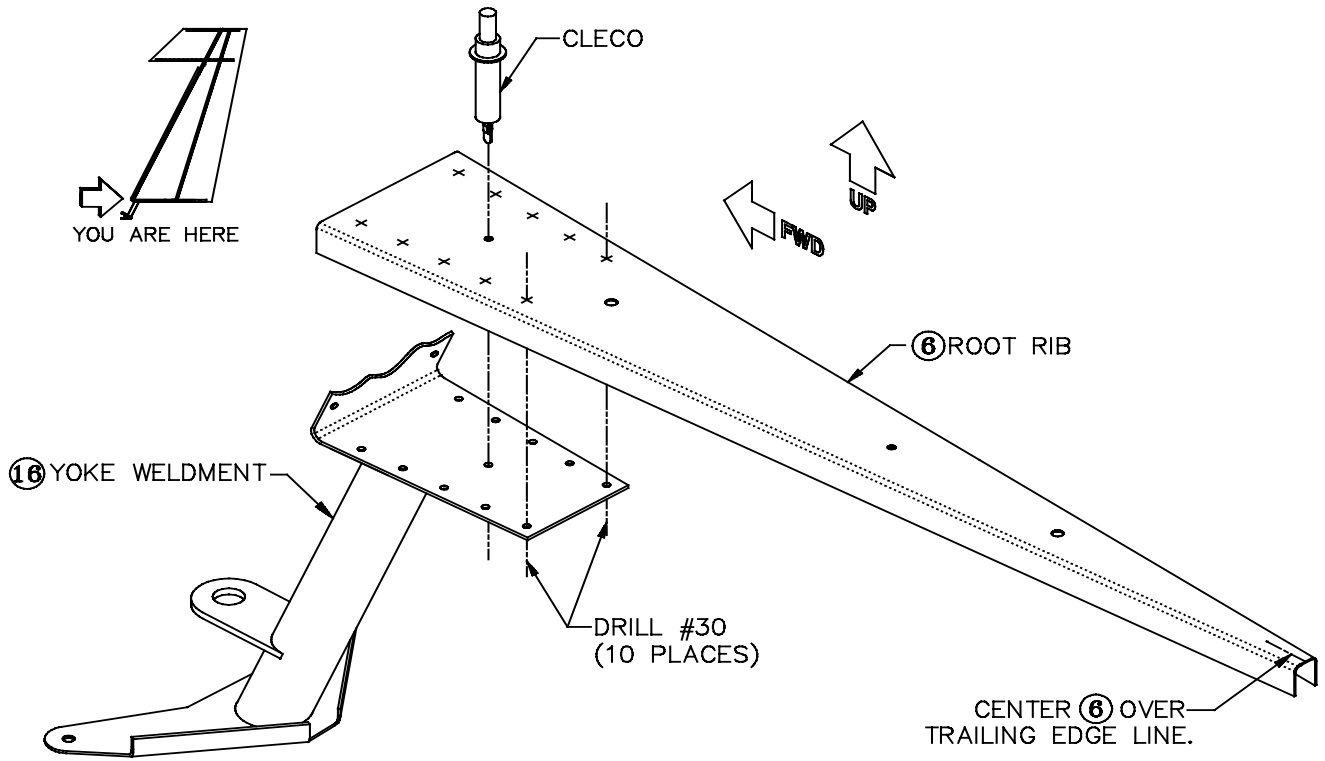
Root Rib/Yoke Weldment Assembly
